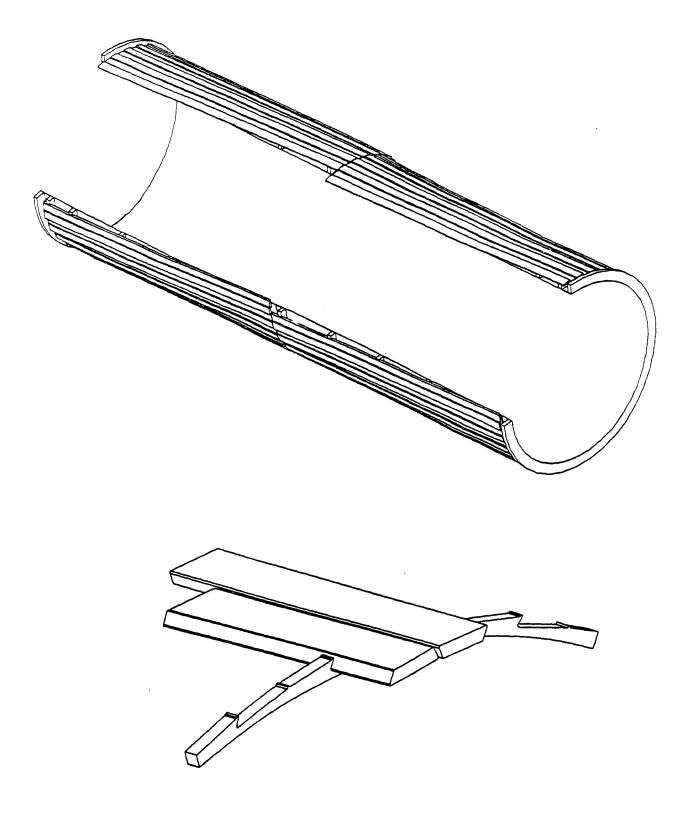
The attachment of the stereo modules to the support structure using the shim rings. A close-up detail is also shown.
